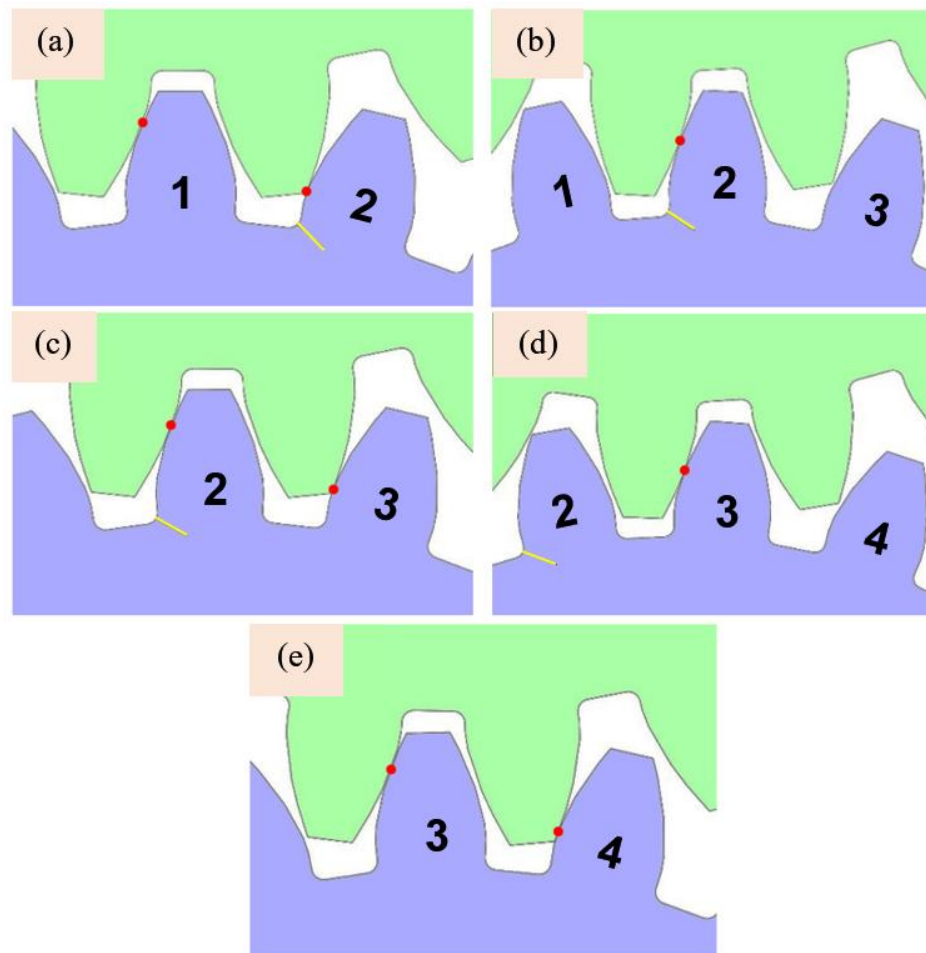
Sequence of engagement of a cracked tooth, (a) Double contact (Start of engagement of a cracked tooth), (b) Single contact (cracked tooth), (c) Double contact (End of engagement of a cracked tooth), (d) Single contact (healthy tooth), and (e) Double contact (healthy teeth)
